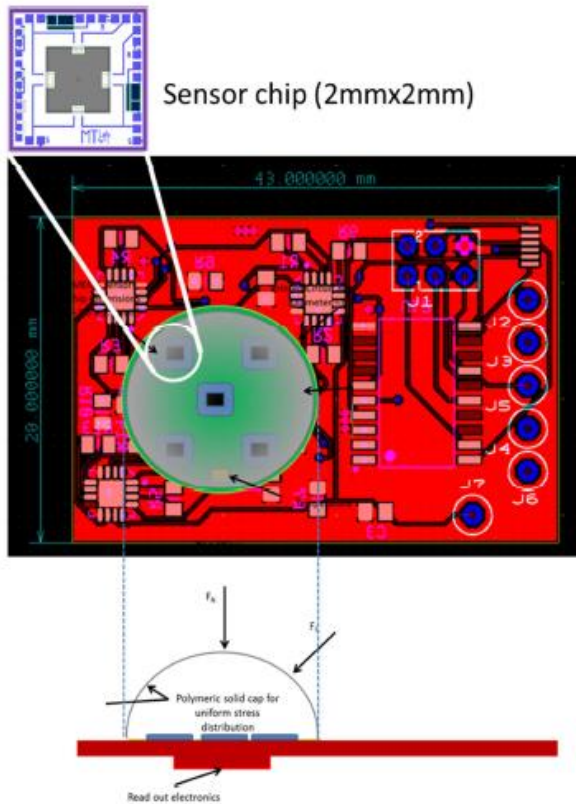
Schematic of the sensor unit: layout of the sensor chip (top) and cross section of the PCB (bottom)
